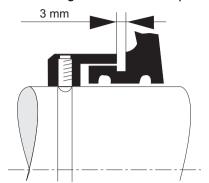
Position the set screws for the labyrinth sealing ring on the outer bearing cover
